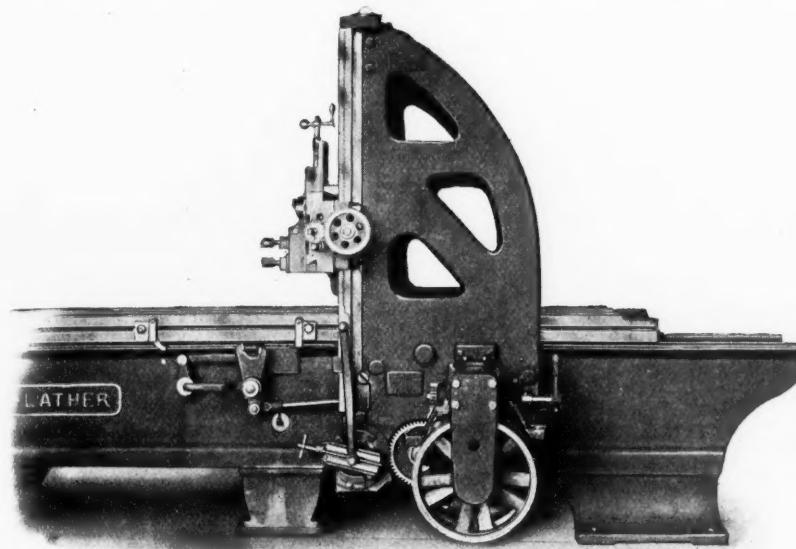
Thirty-inch Flather Planer, with Two Forward Speeds and Constant Quick Return.
